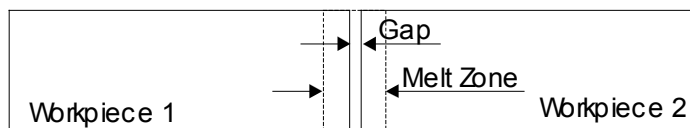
Cross section of workpieces to be joined by laser welding.
